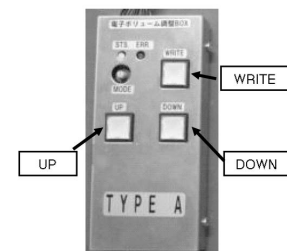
VCOM adjustment jig (RUNTZA059WJZZ)
